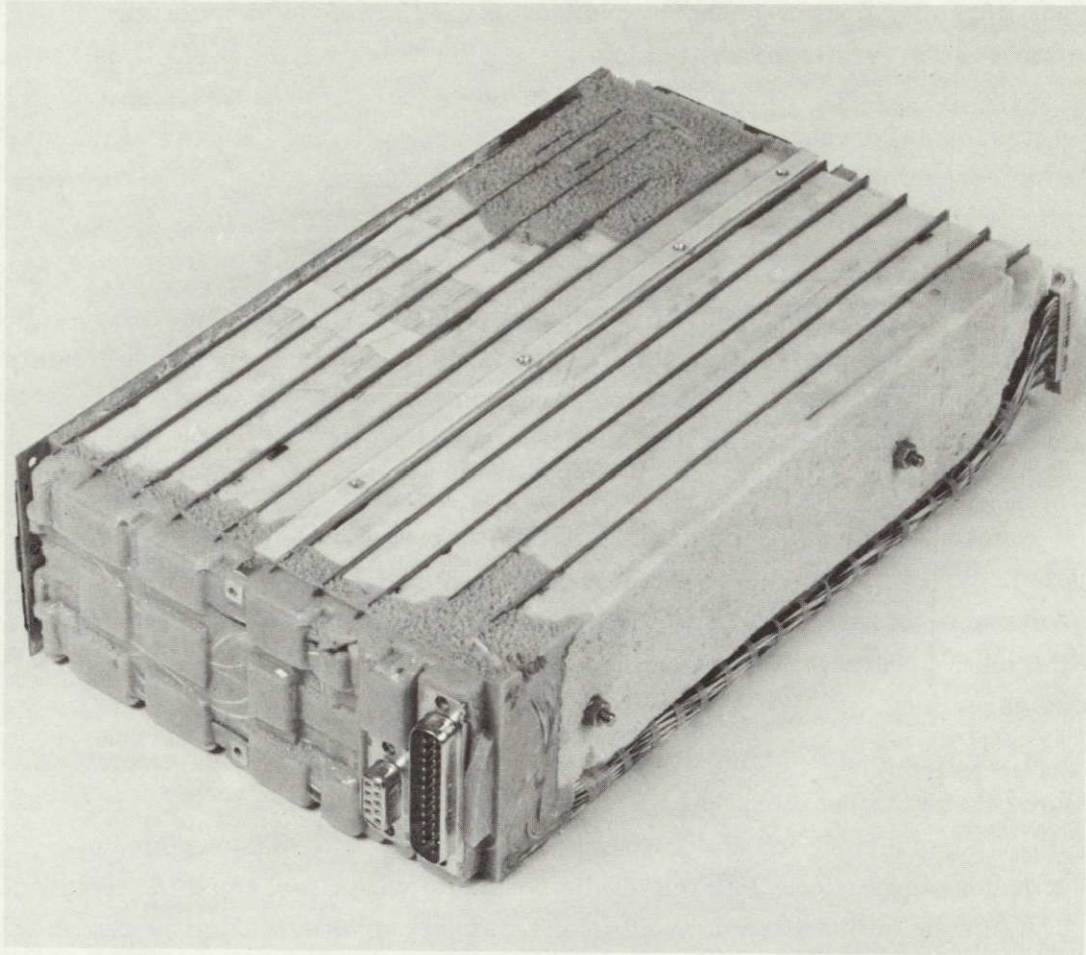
The Completely Assembled and Encapsulated Electronic Stack
